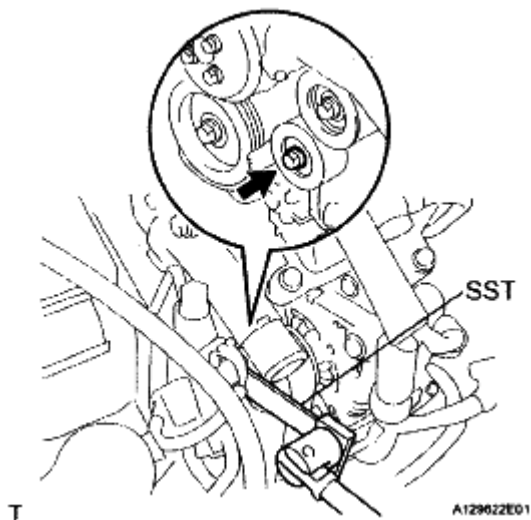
Removal/Installation Of V-Ribbed Belt Using SST
